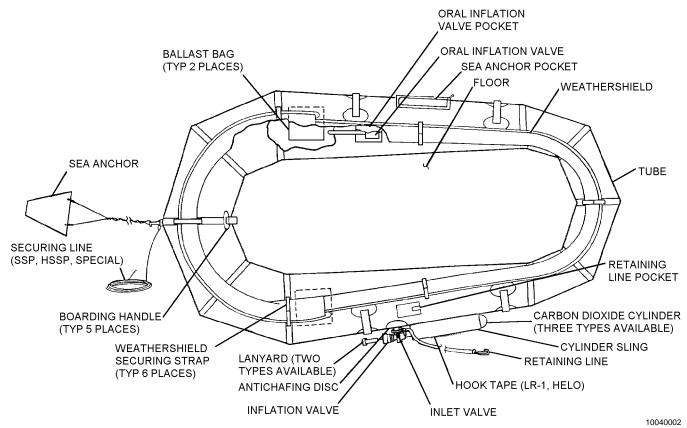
LR-1 Liferaft Assembly, Parts Nomenclature
